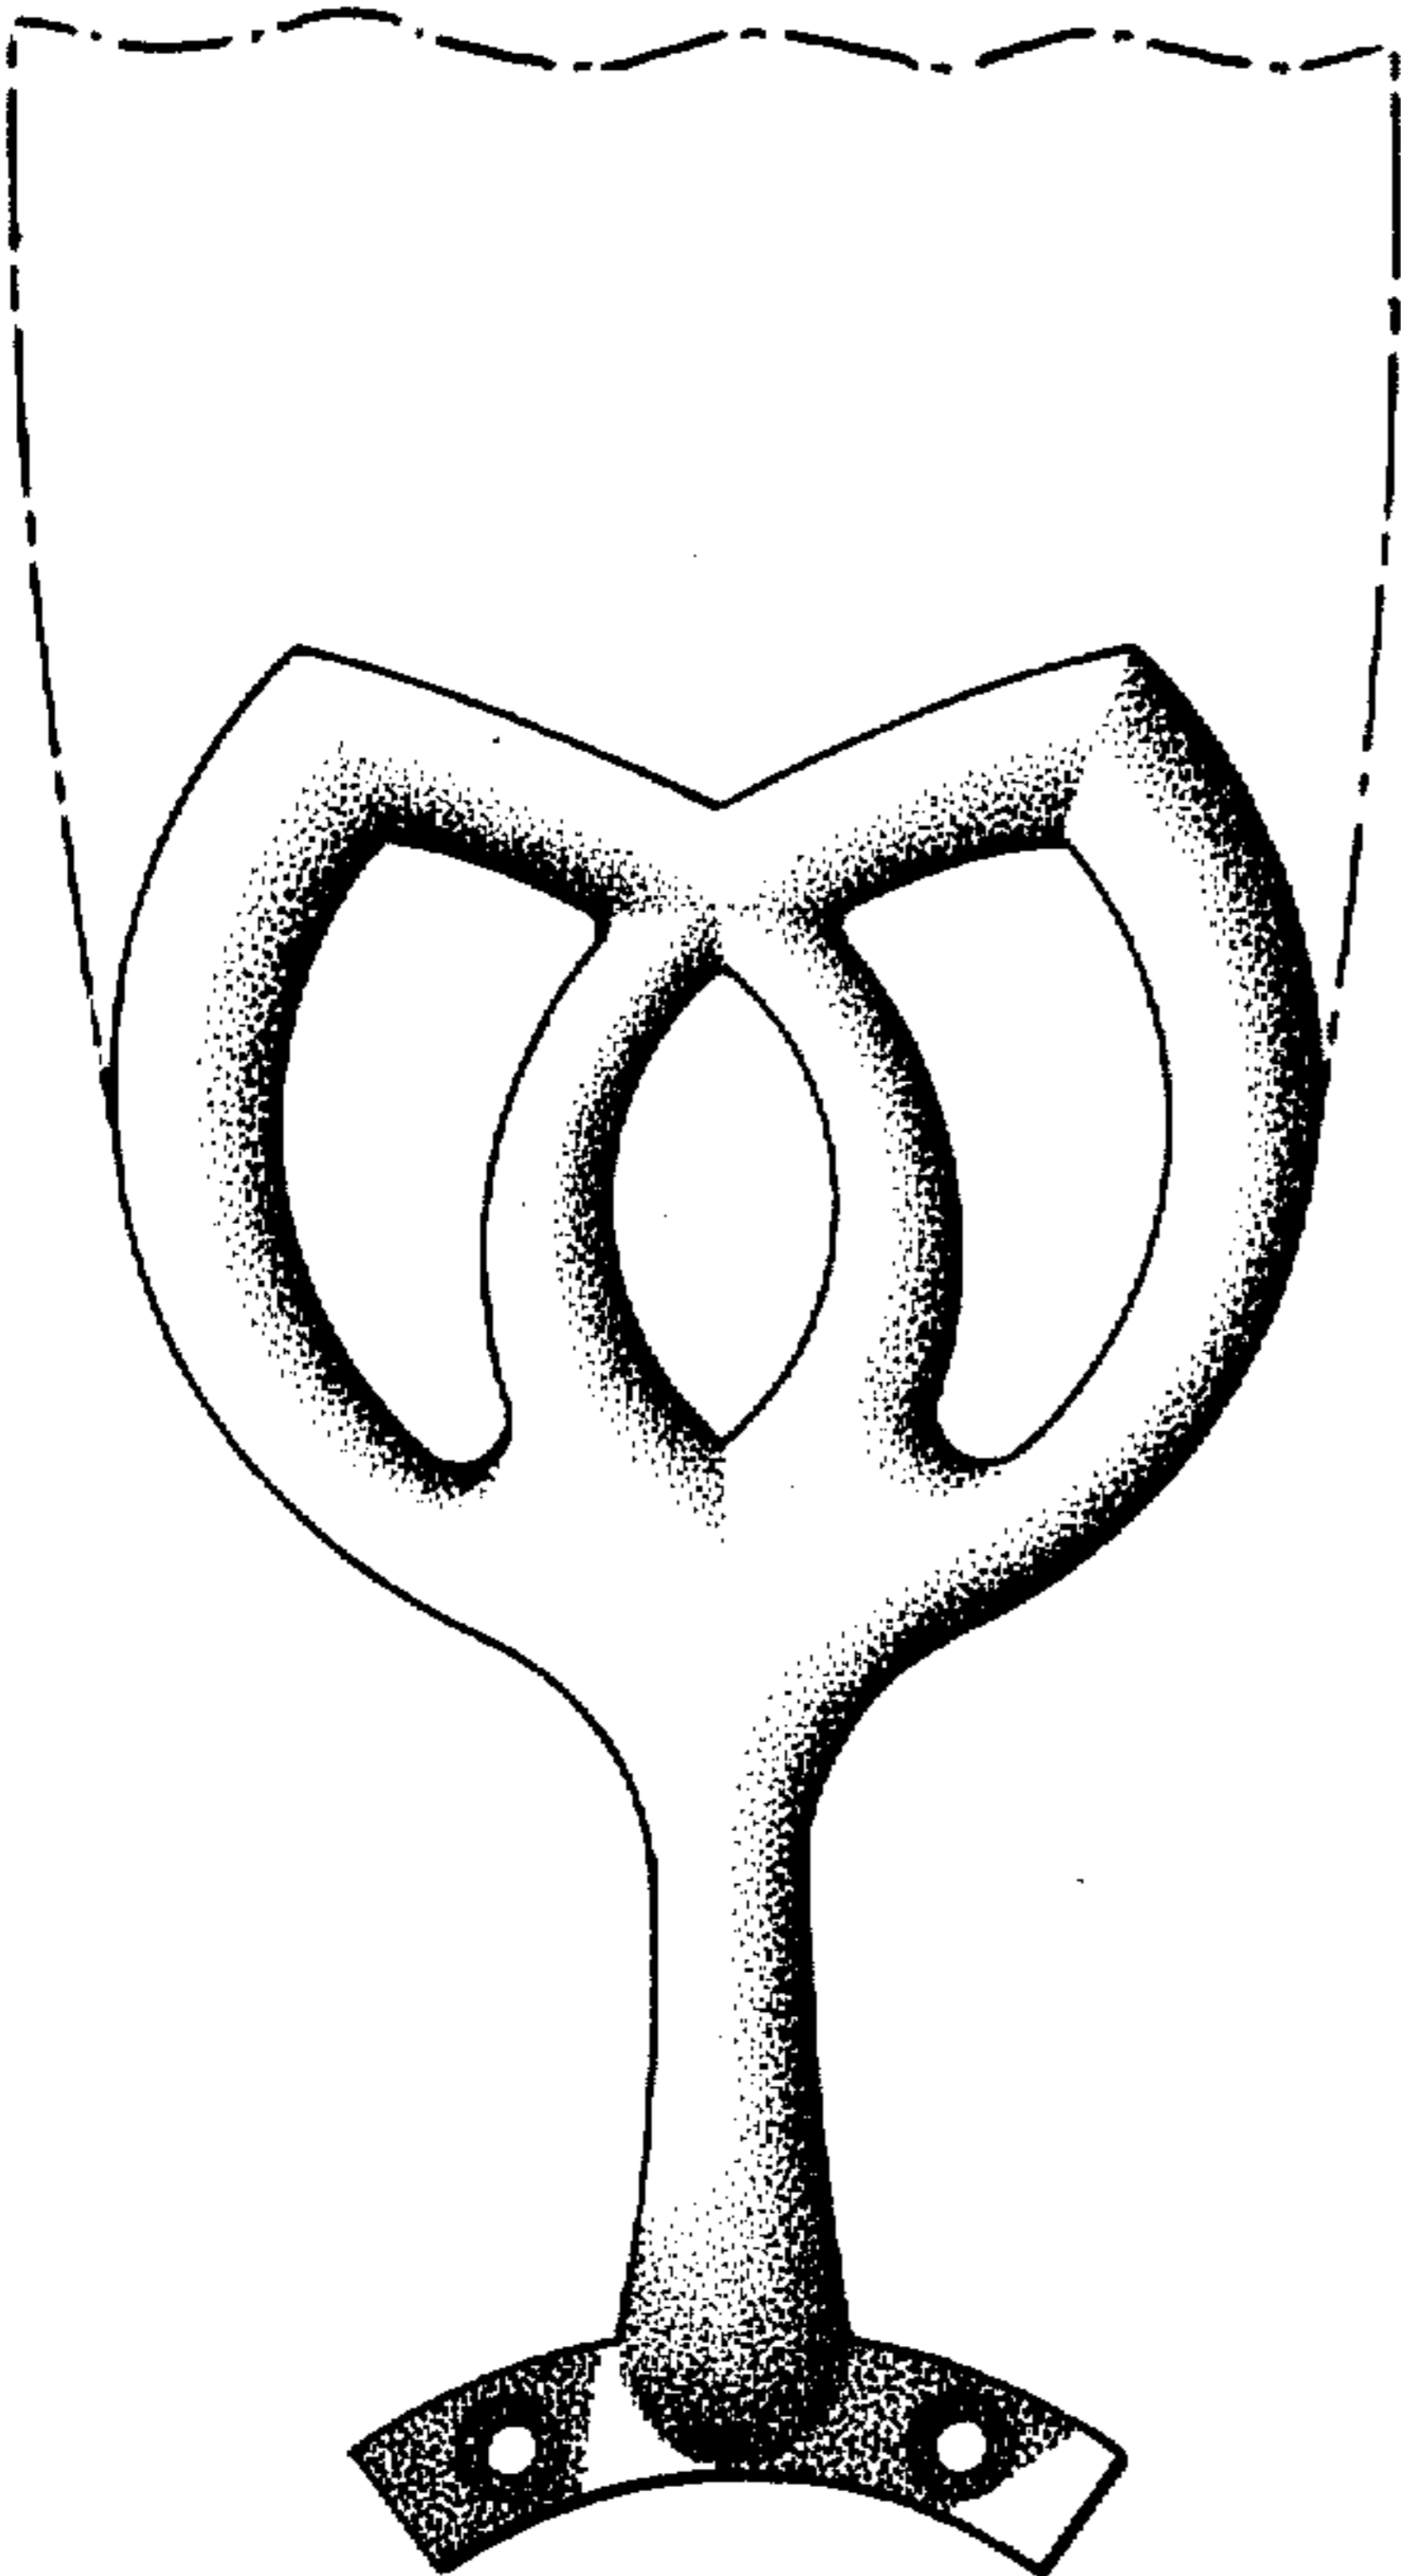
is a bottom plan view of a ceiling fan blade connector showing my new design;
